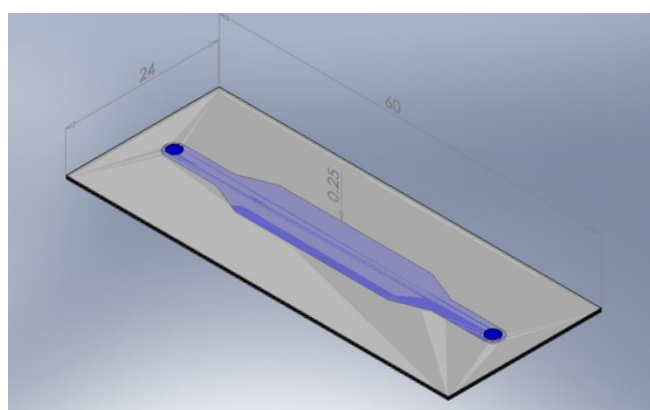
Technical drawing of the fluid cell, in blue is depicted the channel filled with the buffer solution (all dimensions are in mm).
